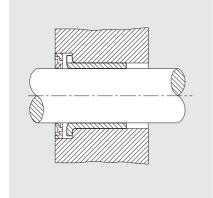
Cylindrical shaft. Axial retention by means of end seal. The recess in the housing must be deep enough to ensure that the collar of the Plastic Plain Bearing will not be pinched.
